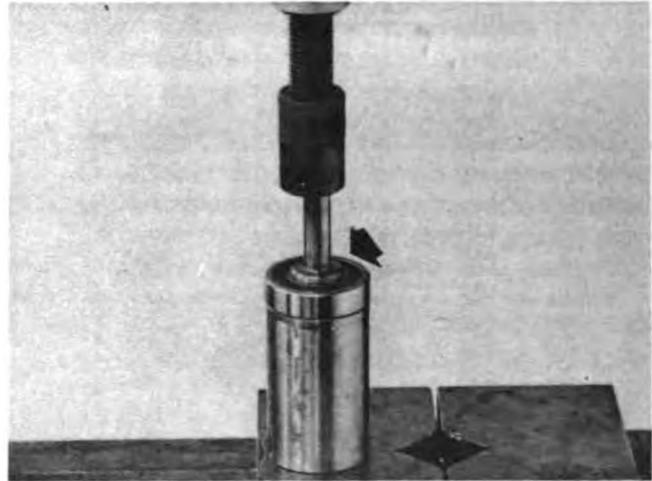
(N10851). Push The Shaft Into The Bearing.
